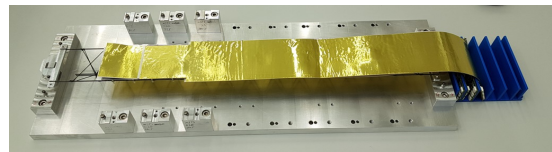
First functional ladder assembled for the mSTS detector in the assembly fixture. Two modules with one 6.2 by 6.2 cm sensor each are mounted. The sensors, located on the left hand side of the carbon frame, are covered by the microcable shielding layer that was not removed there yet.
